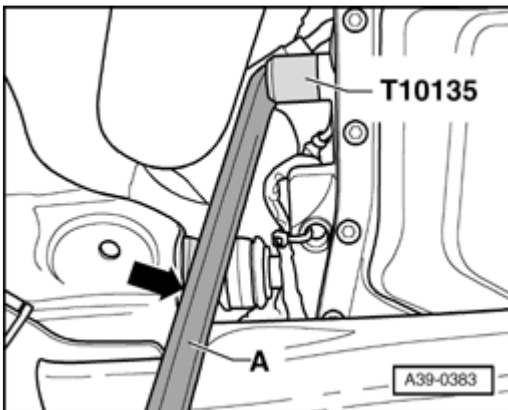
Pressing On New Oil Seal Using Thrust Piece T10135 And Assembly Lever As Far As Stop
